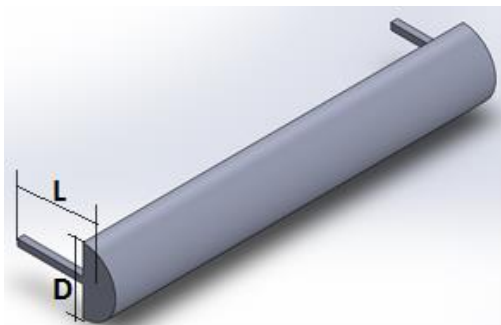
Solid Works drawing of a circular section flow control rod (D=10mm)
